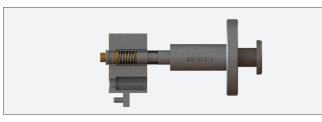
Contact Removed. Uses Tool PN 500-32-015.
